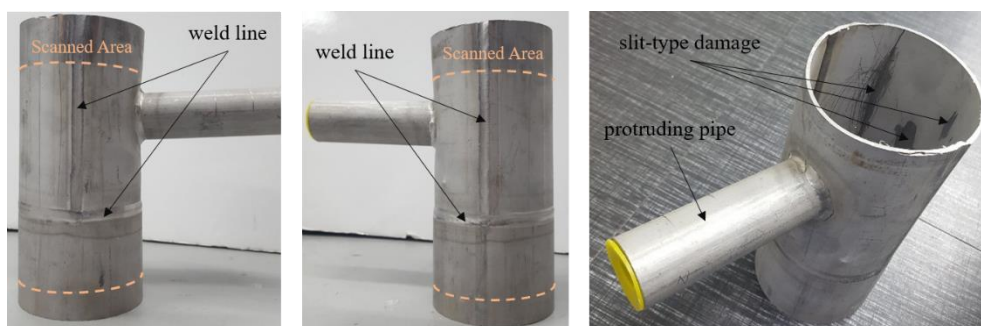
Welded steel pipe specimen showing weld lines and slit-type damages
